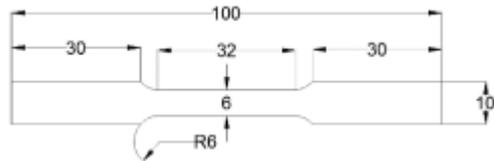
Tensile test specimen dimension according to ASTM E 8M,all dimensions in mm
